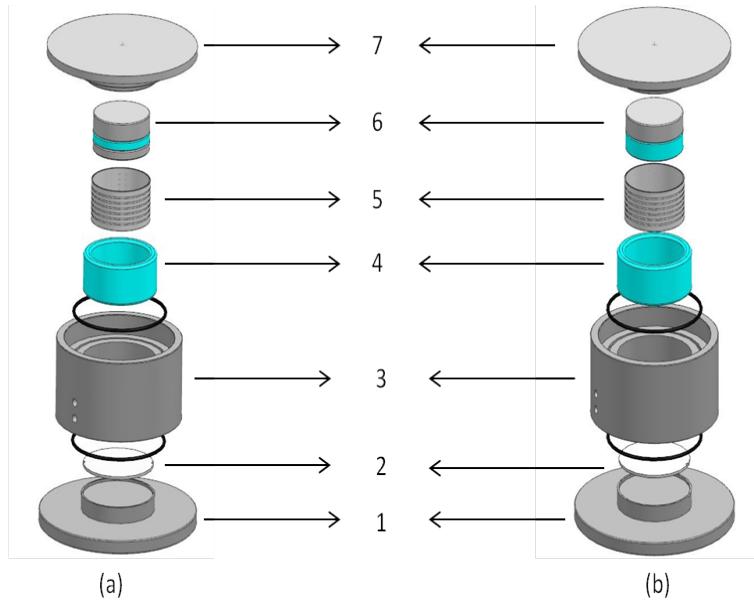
Exploded view of tool setup. (a) setup with solid-solid tool (6). (b) setup with solid-flexible tool (6)
